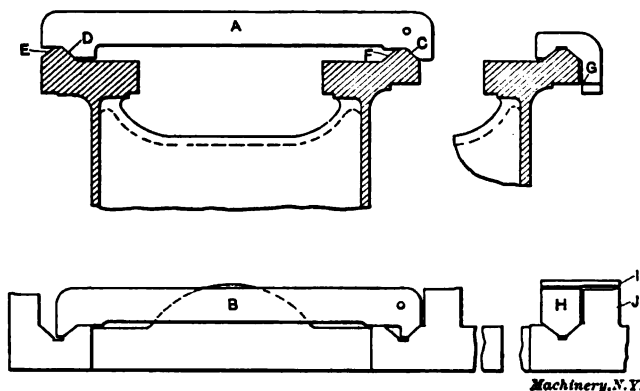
Gages for Testing the Planing of Lathe Bed and Carriage
